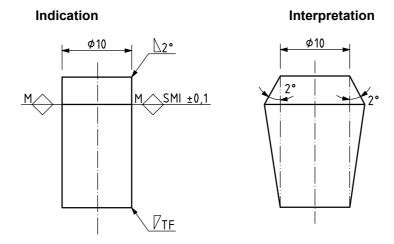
Location dependant draft on a part with a specification of taper to fit (TF)
